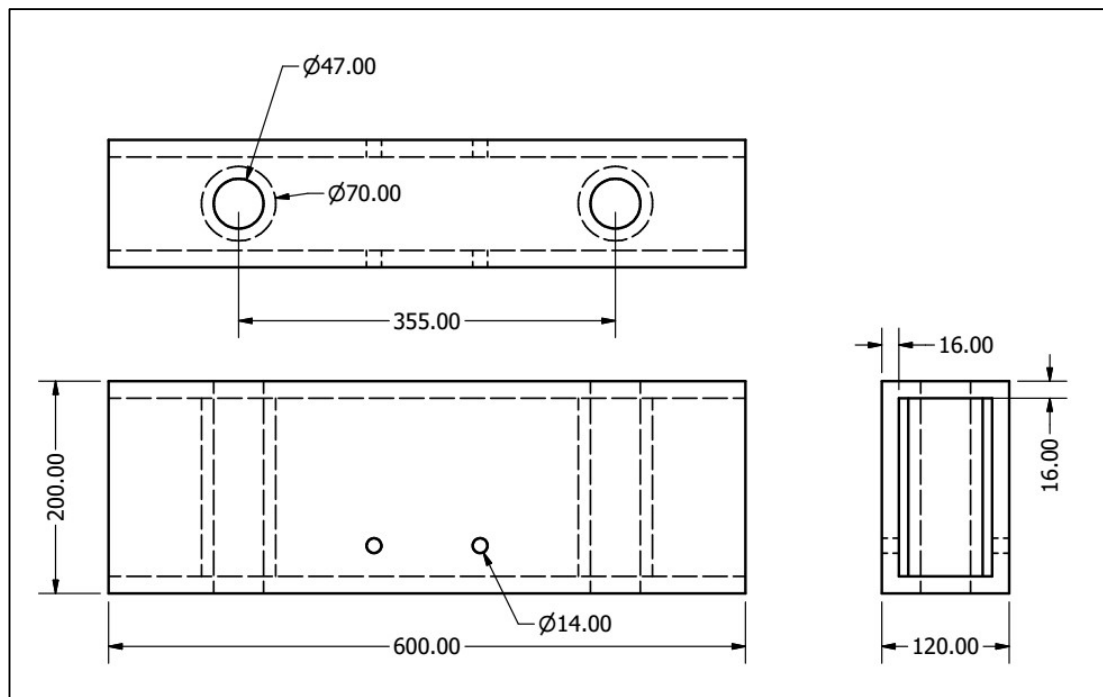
Plan and elevations of upper rectangular hollow section beams
